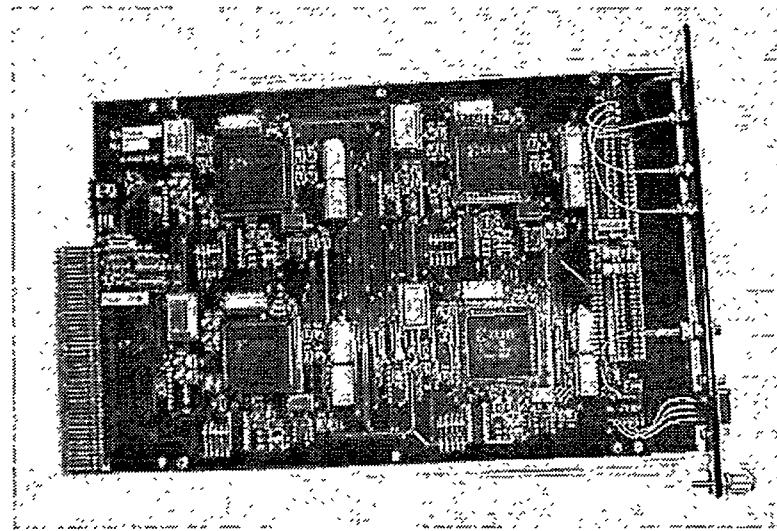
Picture of the NBOTL final assembly (CAMAC single board width).
